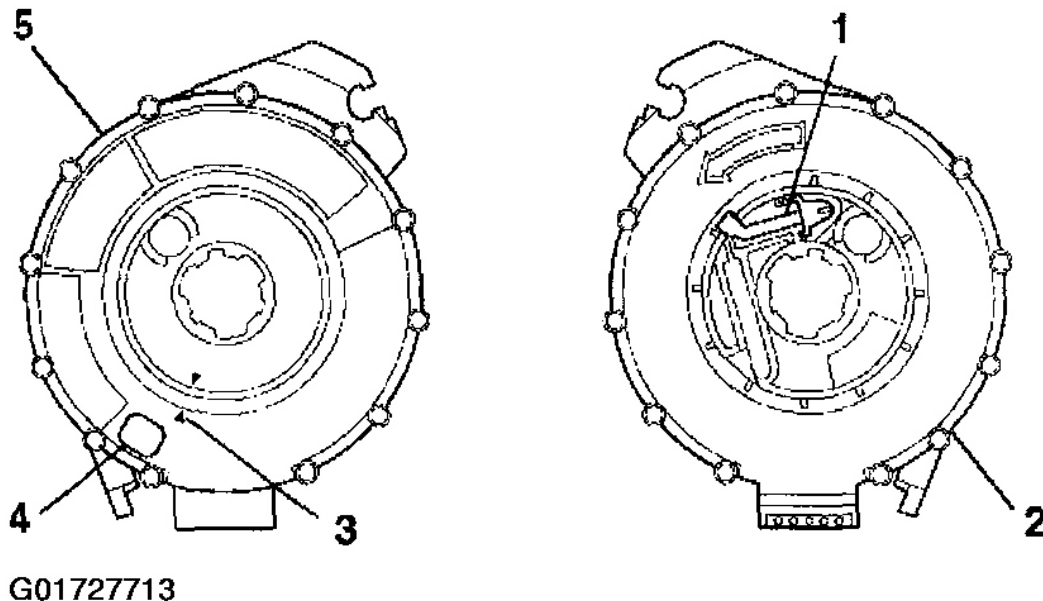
Identifying Inflatable Restraint Steering Wheel Module
